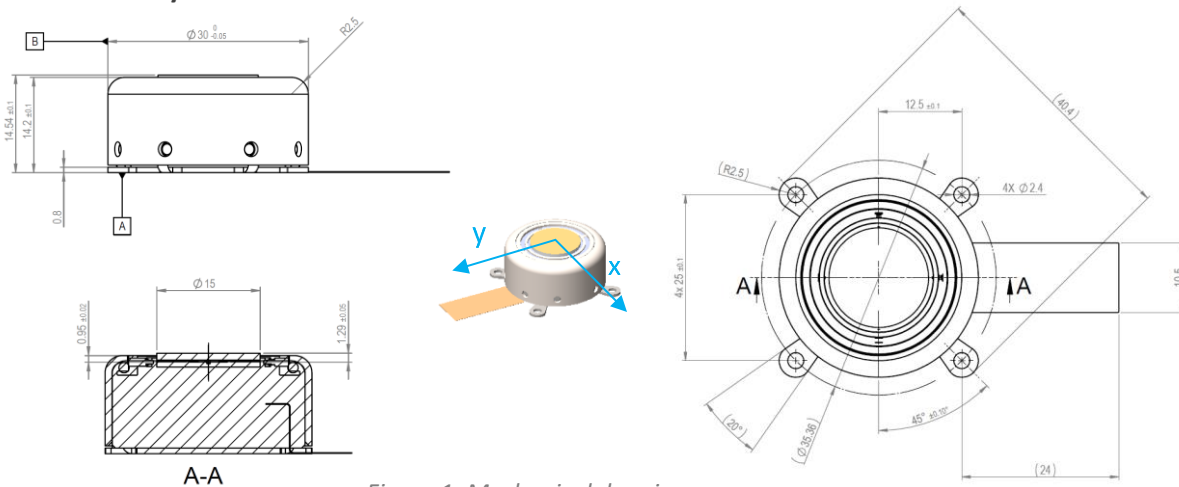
Mechanical drawing of MR-15-30 (unit: mm)
